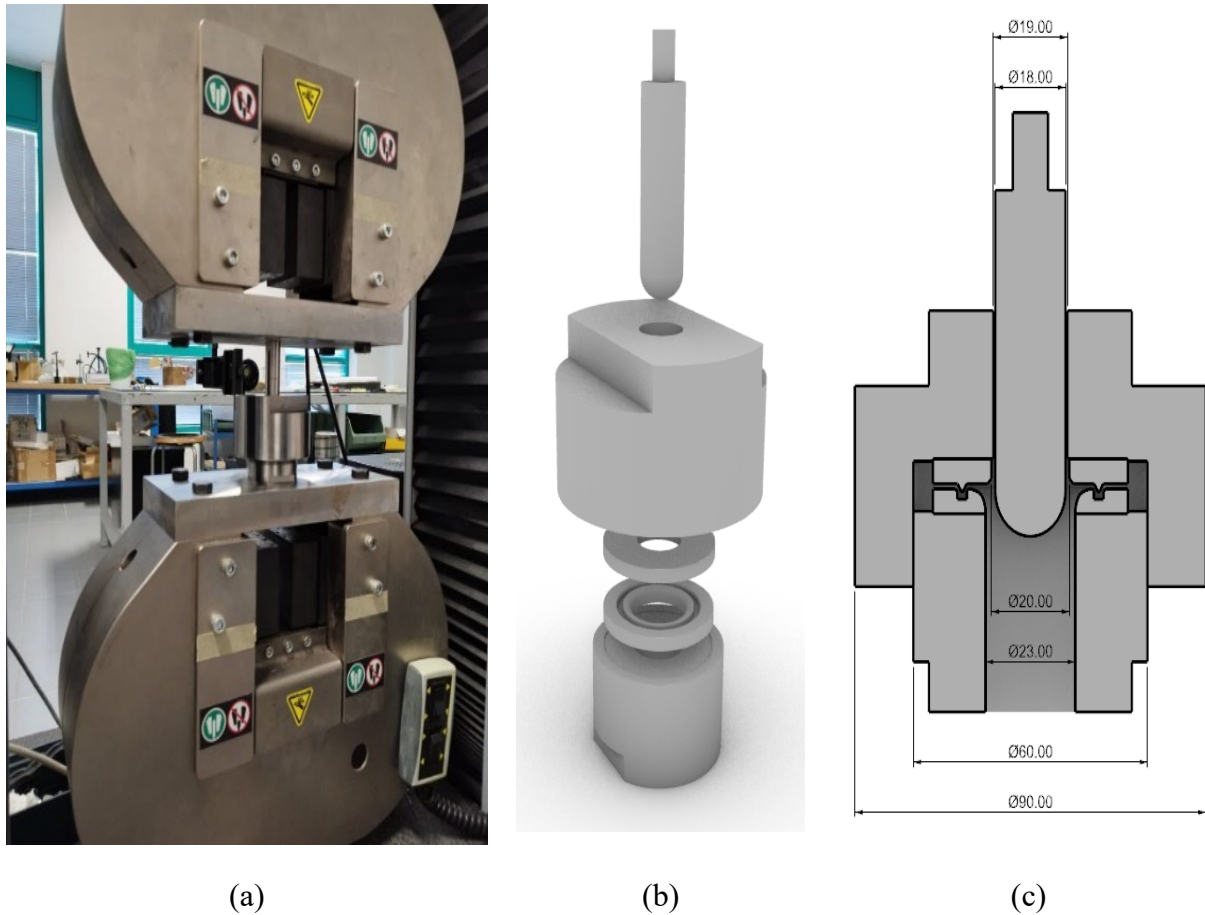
Experimental setup for formability testing: (a) mechanical tooling installed on the universal testing machine, (b) three-dimensional view of the tooling assembly, and (c) dimensioned schematic cross-section of the system.
